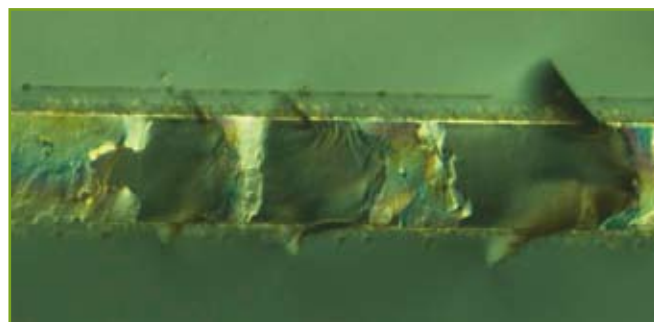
Assembly of Si and quartz samples exhibiting cracks.
